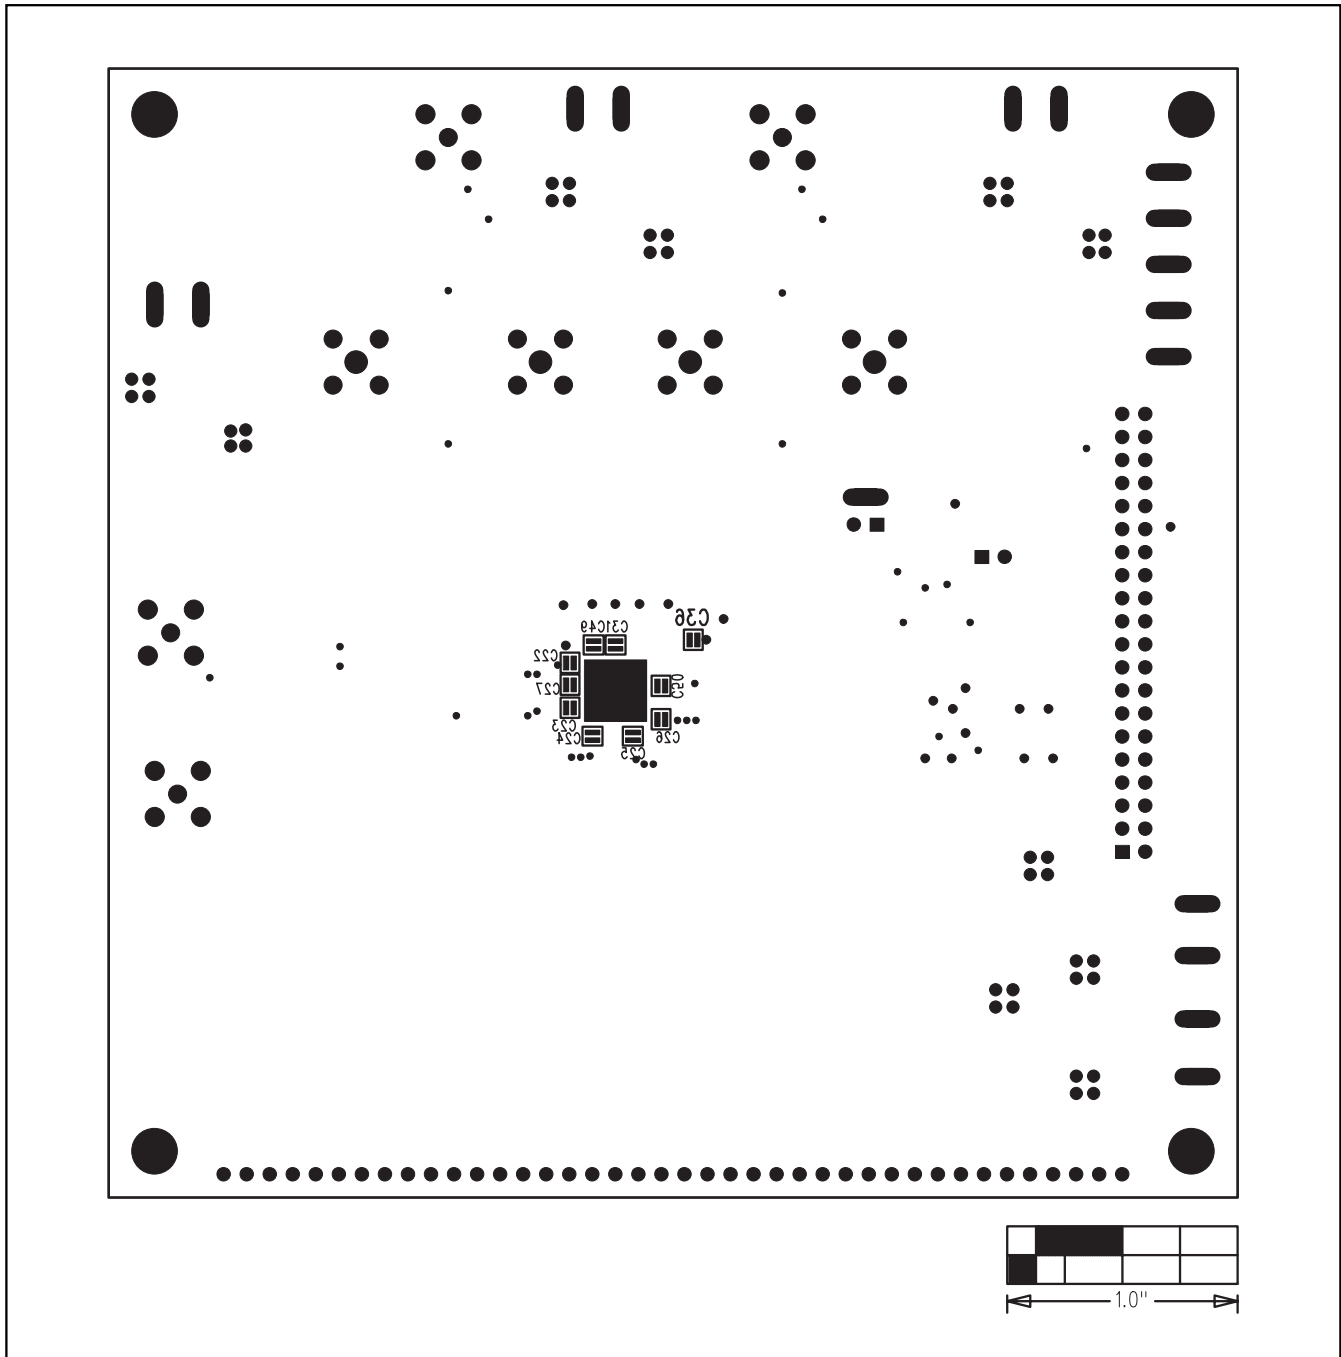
MAX5893/MAX5894/MAX5895 EV Kit Component Placement Guide—Solder Side
